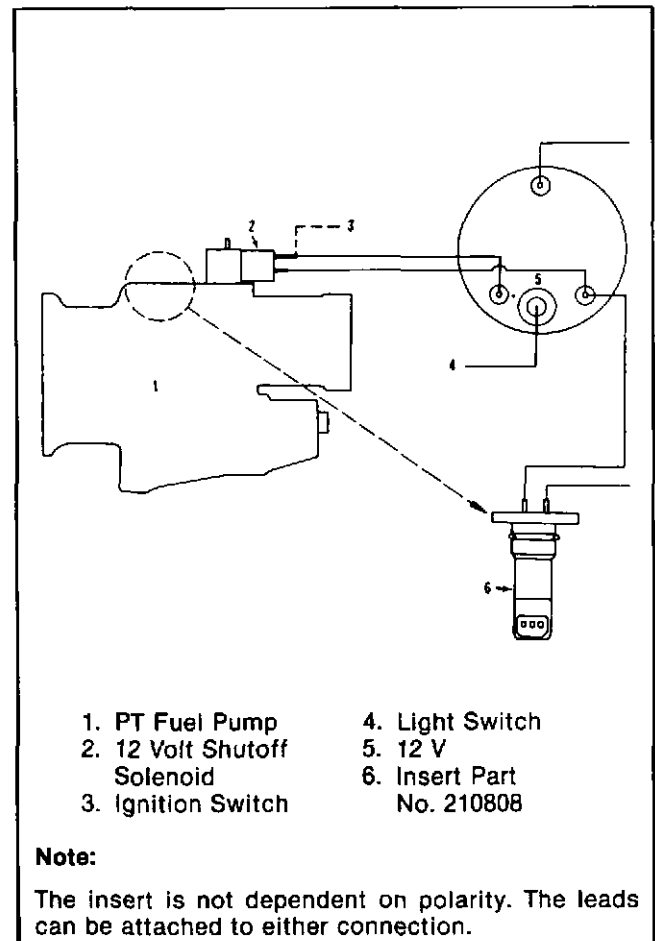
, (F5255). Wiring diagram of the electronic tachometer.
